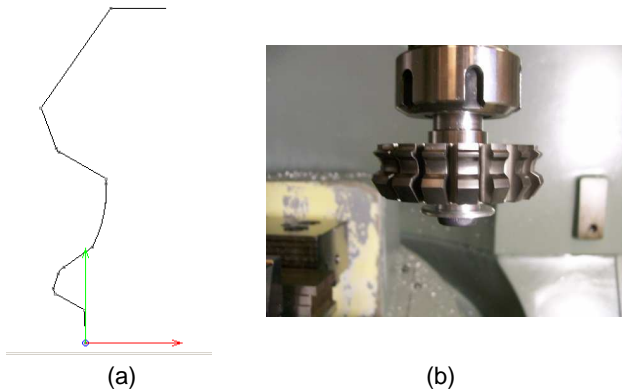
Custom profiling tool (a) CMM output of the profile for the custom multi-segmented tool, (b) actual tool.
